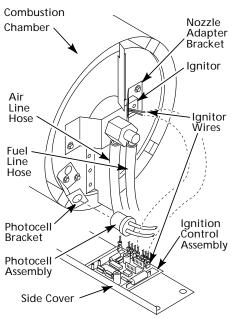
Disconnecting Ignitor Wires from Ignition Control Assembly 6. Remove combustion chamber. Stand combustion chamber on end with nozzle adapter bracket on top (See Figure 17).
